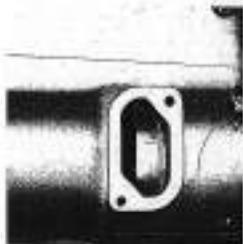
Letter and line stamped on pump flange, aligned with plug end.
